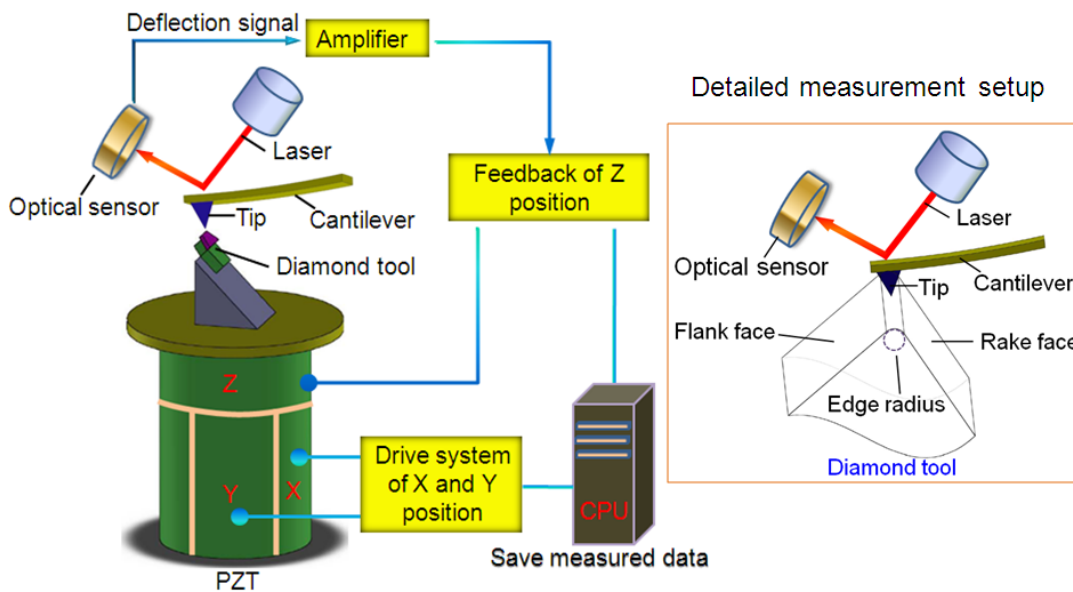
Schematic diagram of the measurement method to obtain tool edge radius
